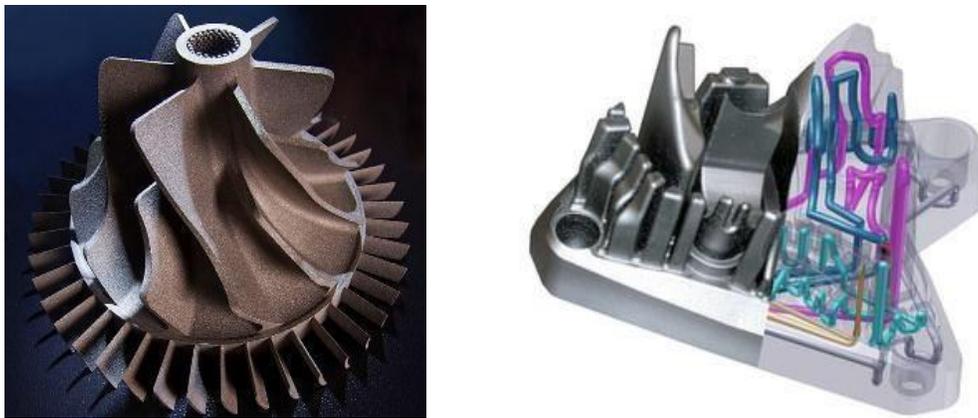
Typical metal parts made by additive manufacturing [1, 2].
